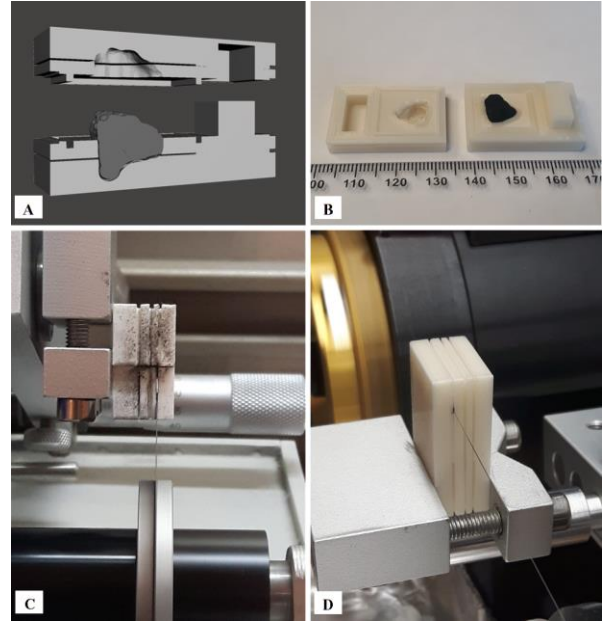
3D-printed custom sample holder segments. A) Cross section through exploded view with sample loaded. B) EG-06 clast loaded in half of holder (mm scale). C) ET-03 sample cutting on Buehler low speed saw. D) EG-06 cutting on Well diamond wire saw.
